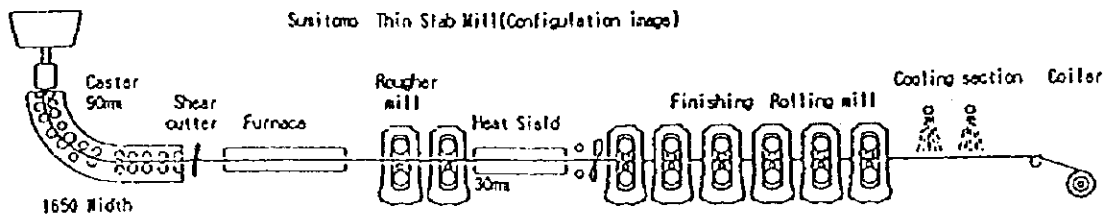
Schematic drawing of MSP (Sumitomo Thin Slab Mill)
